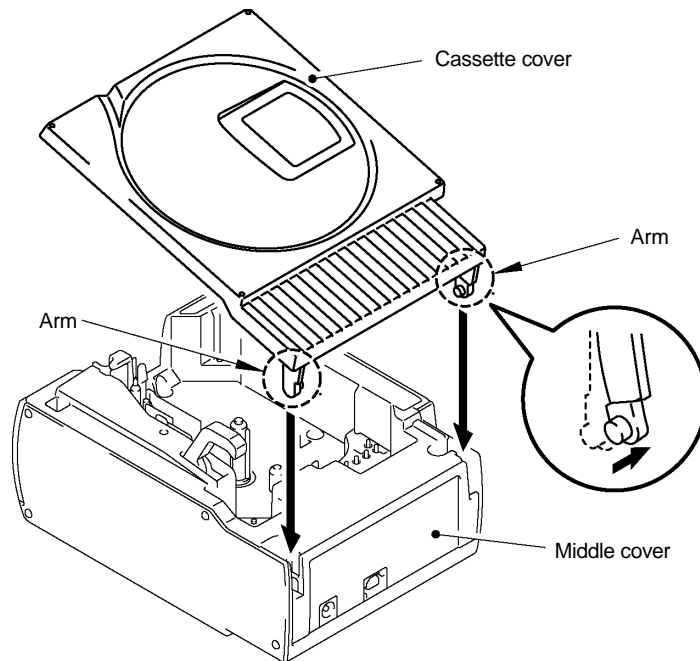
Assembling the Bottom Cover (1)
